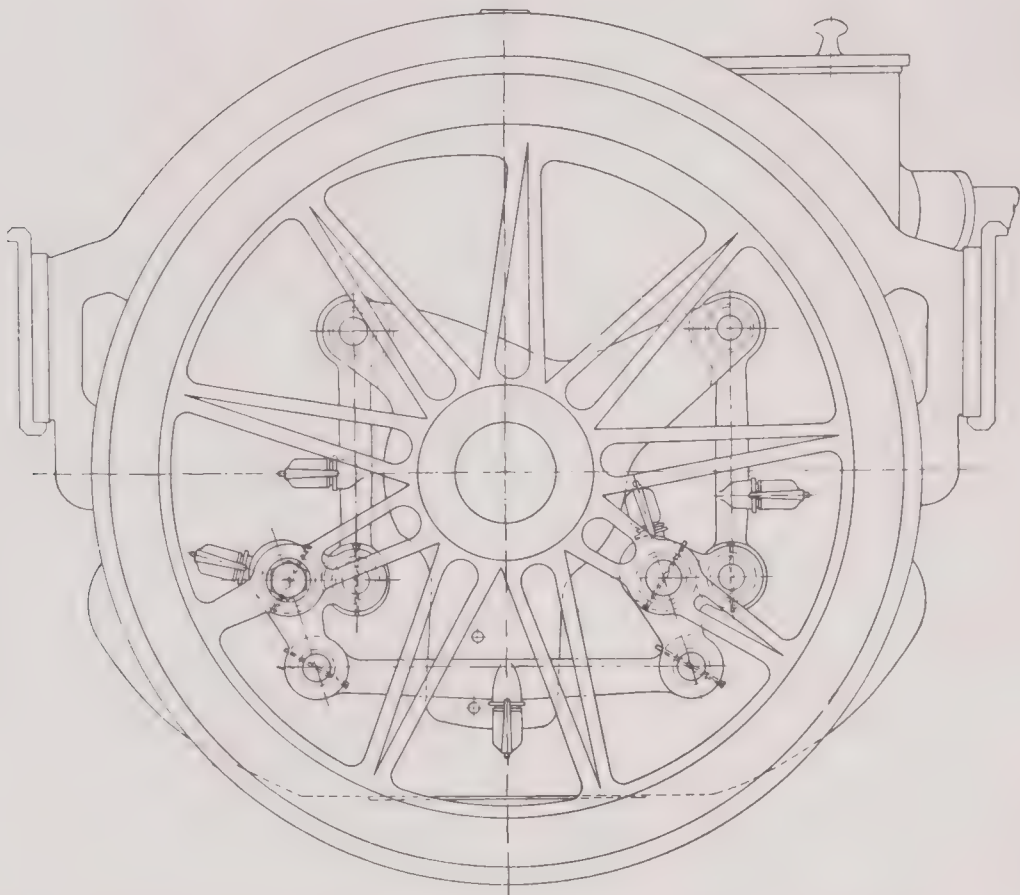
ELASTIC COUPLING BETWEEN WHEEL AND MOTOR OF VALTELLINA MOTOR CARRIAGE.
